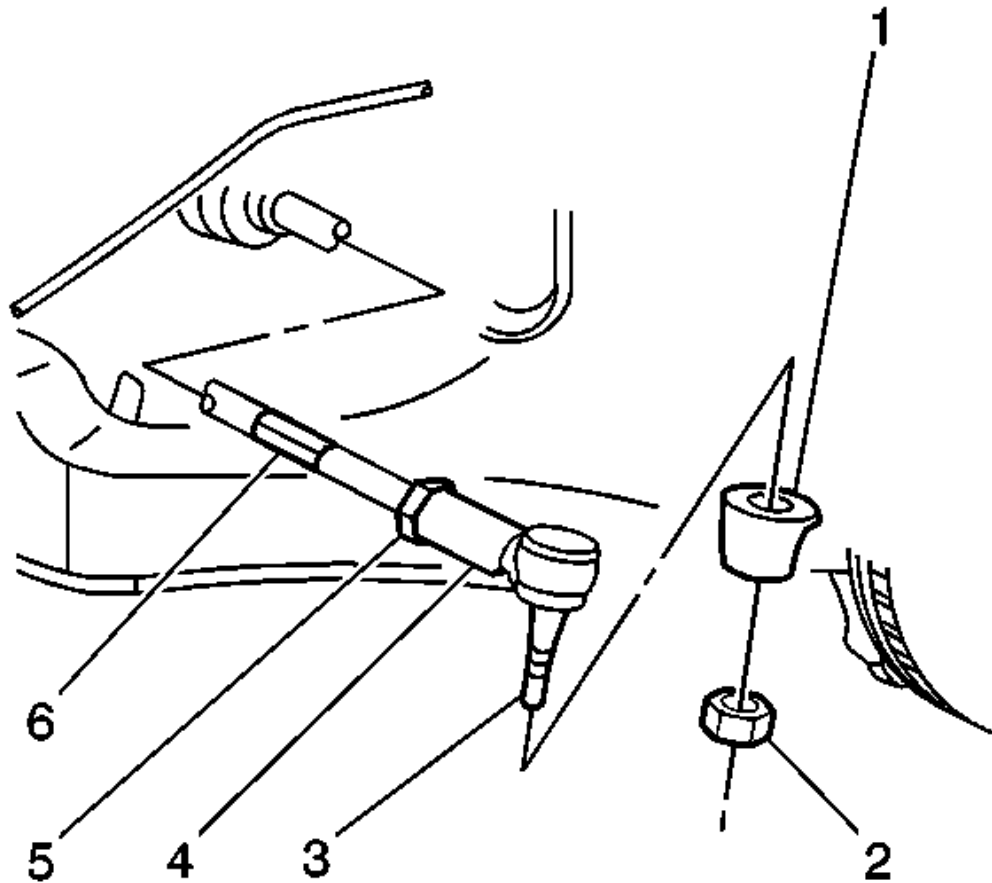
View Of Tie Rod Jam Nut & Adjuster
